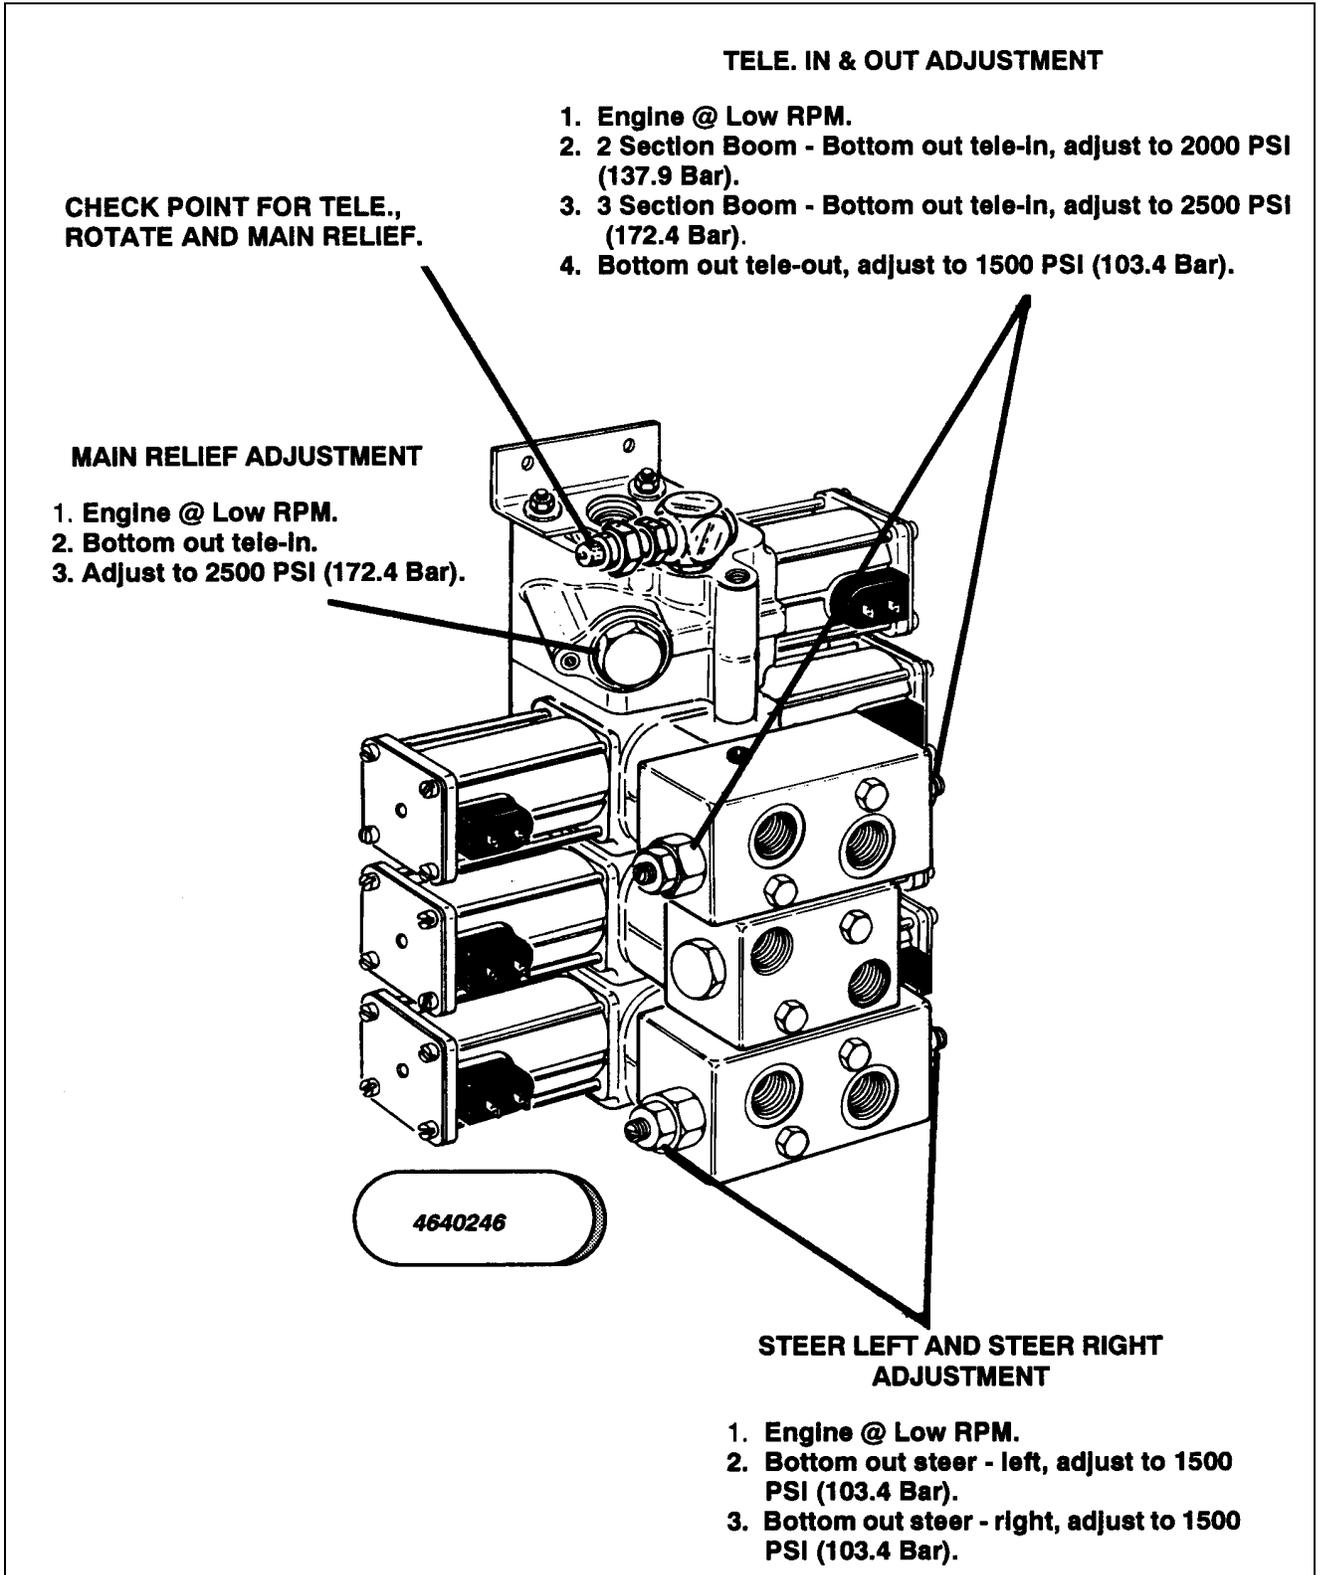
Solenoid Valve Pressure Settings. (Machines Built Prior To 1992 With Steering Wheel)
